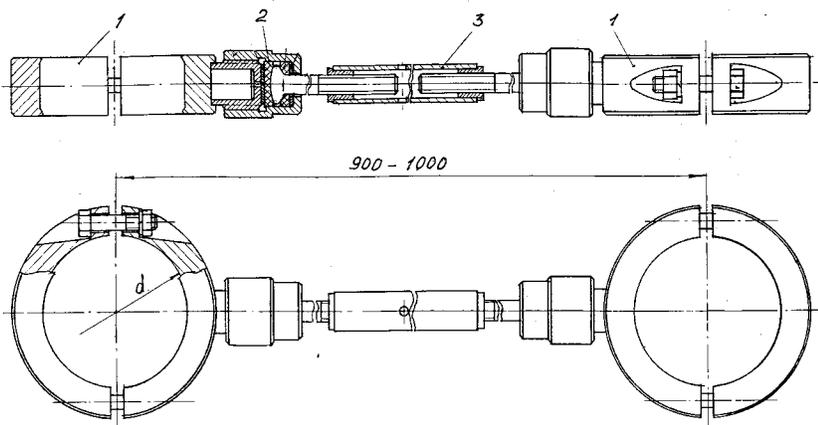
A fixing spacer-damper with a resin-metal hinge:
